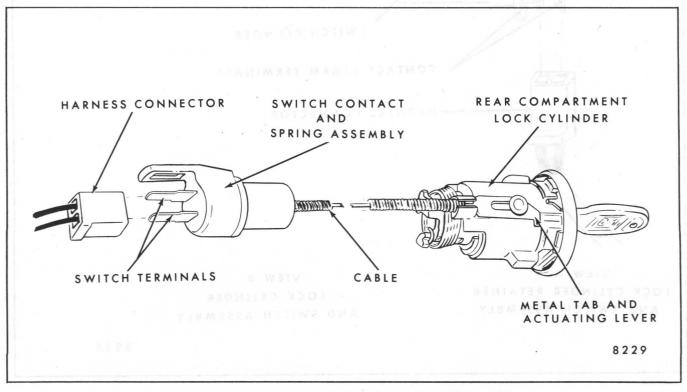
Rear Compartment Lock Cylinder and Switch Assembly
